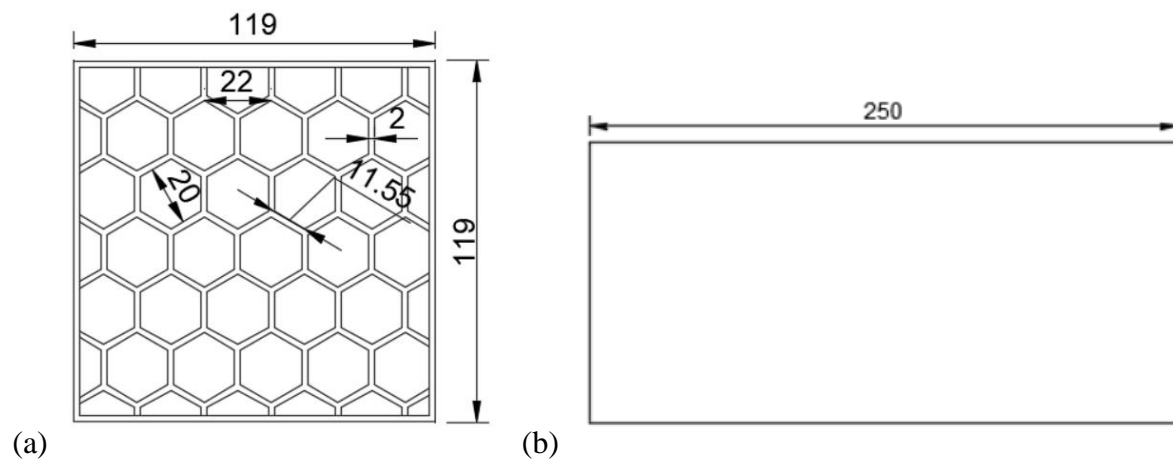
Front view honeycomb dimensions (a) Side view honeycomb dimensions (b)
